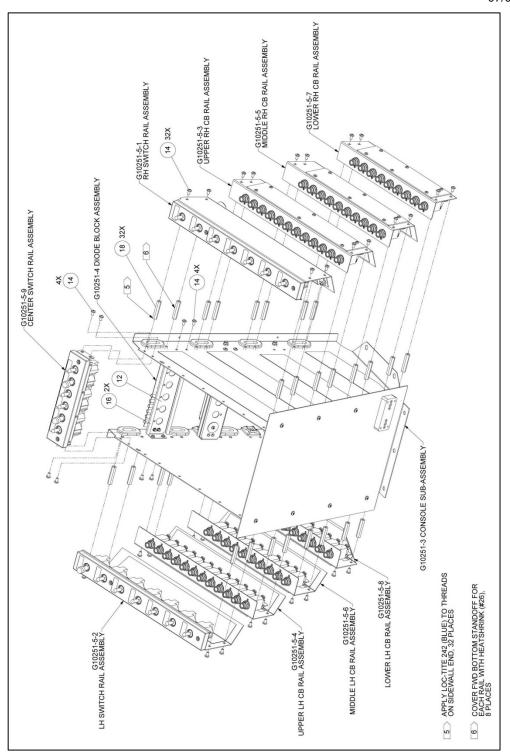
P132 CONSOLE, ASSEMBLY DETAILS (G10251)
